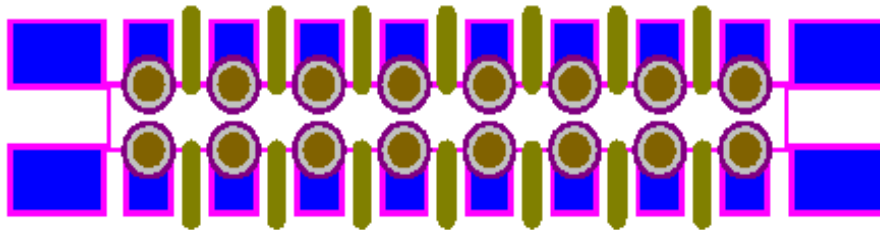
Plug-in PCB Land Pattern (Unit: mm)
